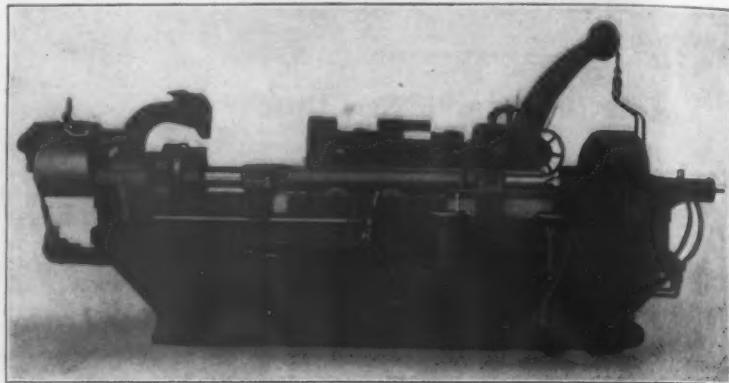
Axe on Centers; Hoist for Handling Grinding Wheel at Right.
